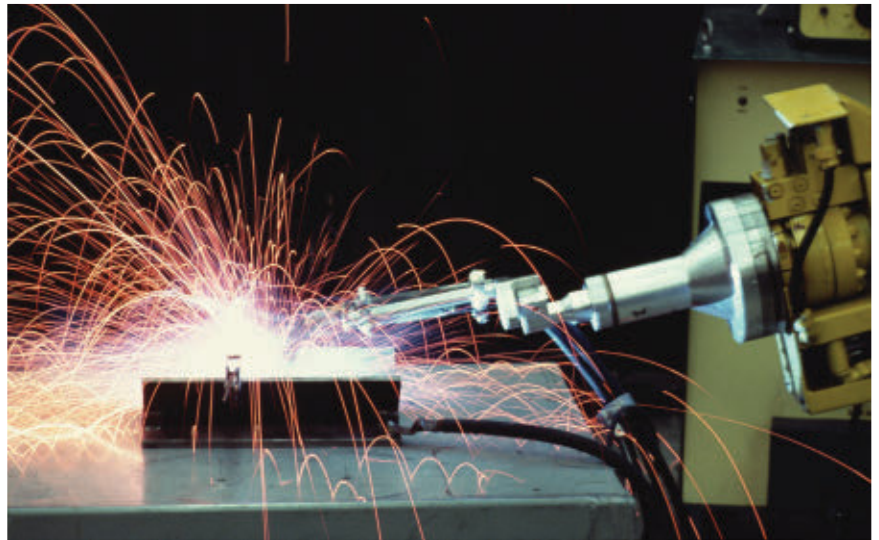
A machine-vision system that includes a red-emitting LD carries out in-process (real-time) inspection of weld seams. (Courtesy of Coherent)
